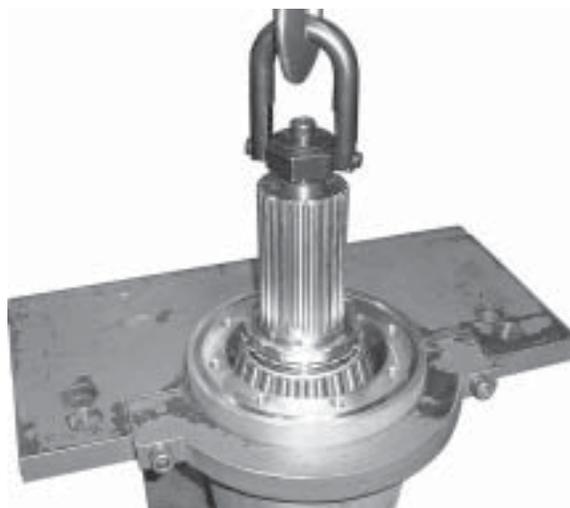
Installing Propeller Shaft Assembly into Thrust Tube
